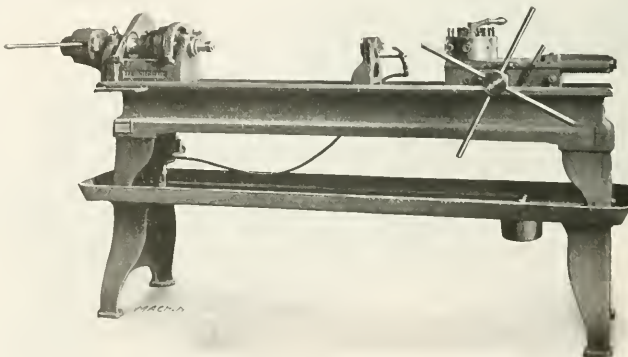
Machine designed for Use in machining Chamber in Rifle Barrels
